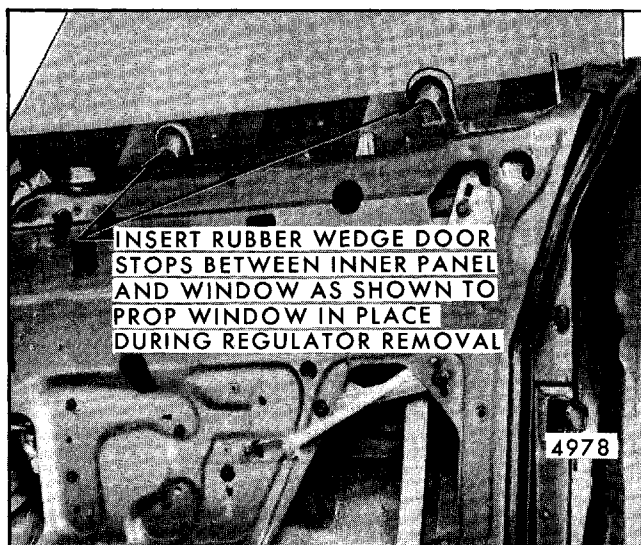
Door Window Propped in Place for Regulator Removal
